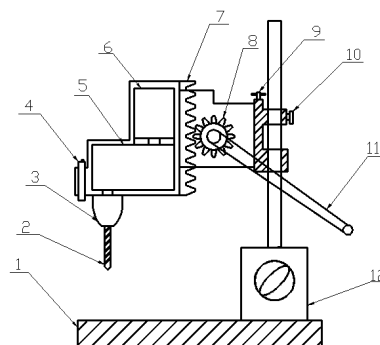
Schematic diagram of the auxiliary manipulator for threaded hole machining in narrow spaces (1-Workpiece to be processed; 2-Drill bit; 3-Drill chuck; 4-Laser locator; 5-Reducer; 6-Motor; 7-Rack; 8-Pinion; 9-Fixing pin; 10-Positioning pin; 11-Handle; 12-Magnetic base)
